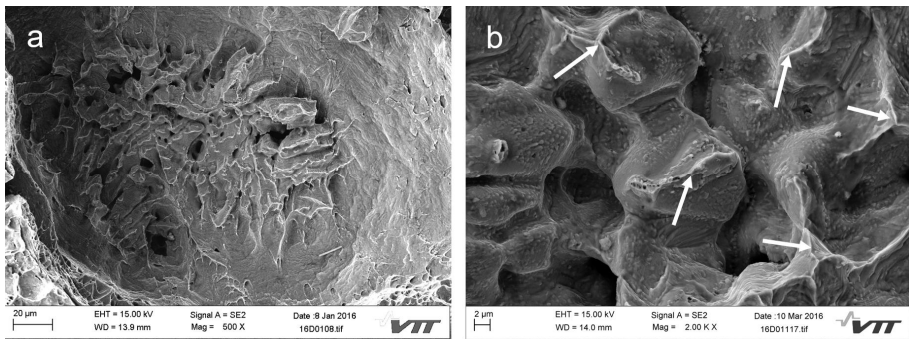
SEM images of weld defects observed on the fracture surface of J-R test specimens. The morphology of a small (~100 μm) weld defect, located on the bottom of a dimple in Alloy 52, is typical of a solidification structure, as shown in a. A larger magnification image of another weld defect is shown in b. Carbides are present on the surface and the weld defect has a dendritic and porous appearance. Some parts of the surface show plastic deformation (arrows) and have thus been partially attached to the mating fracture surface.
